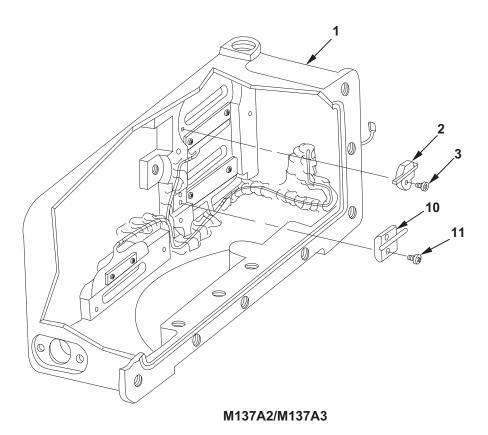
Counter Box Assembly, M137, 11741102-1, and Counter Box Assembly, M137A2/M137A3, 12984734, Internal Parts (Sheet 2 of 2).
